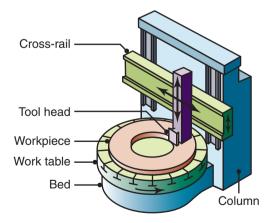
Schematic illustration of a vertical boring mill. Such a machine can accommodate workpiece sizes as large as 2.5 m in diameter.
